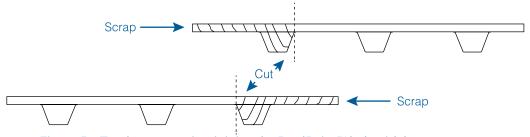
Tooth pattern after joining the DualDrive™ belt with lace
